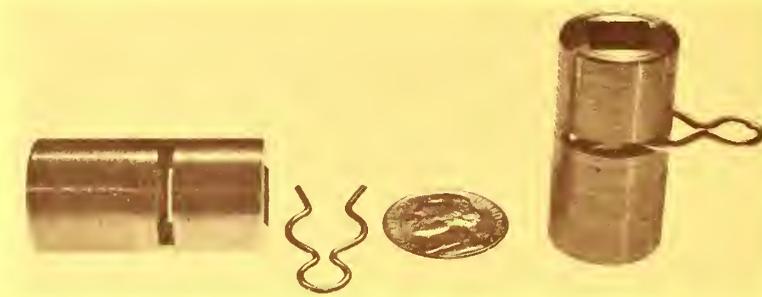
Improved square-holed sleeve adapter with reinforcing sleeve and custom-fitted stainless-steel clip.
